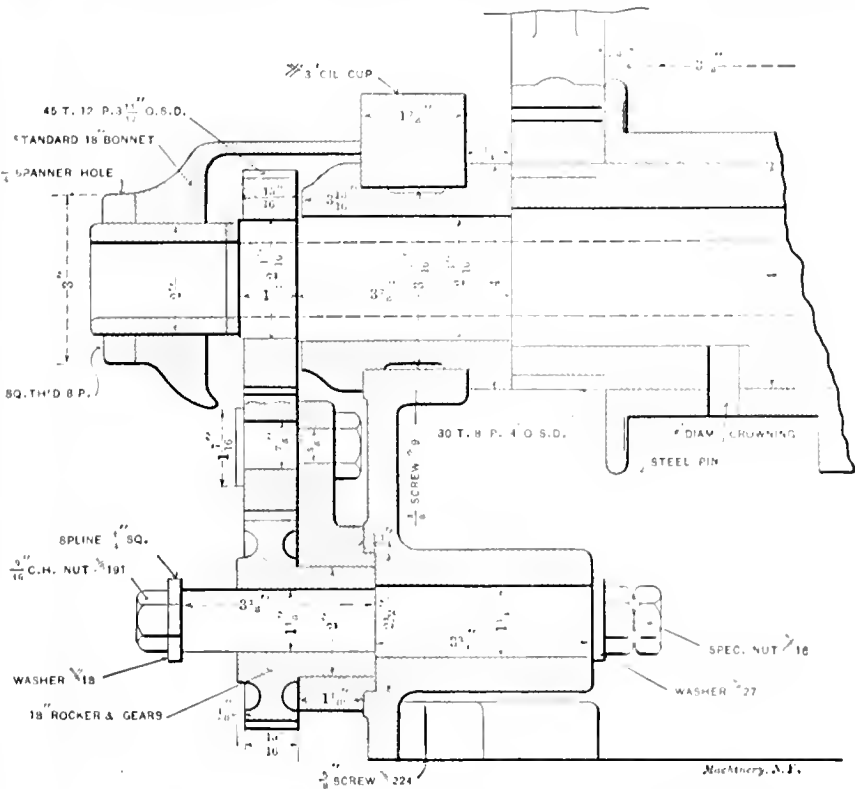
Part of a General Drawing showing large number of Dimensions used.
